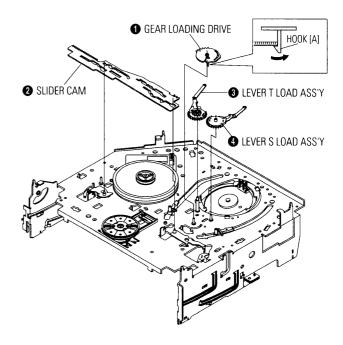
Gear Loading Drive, Slider Cam, Lever T, S Load Ass'y
